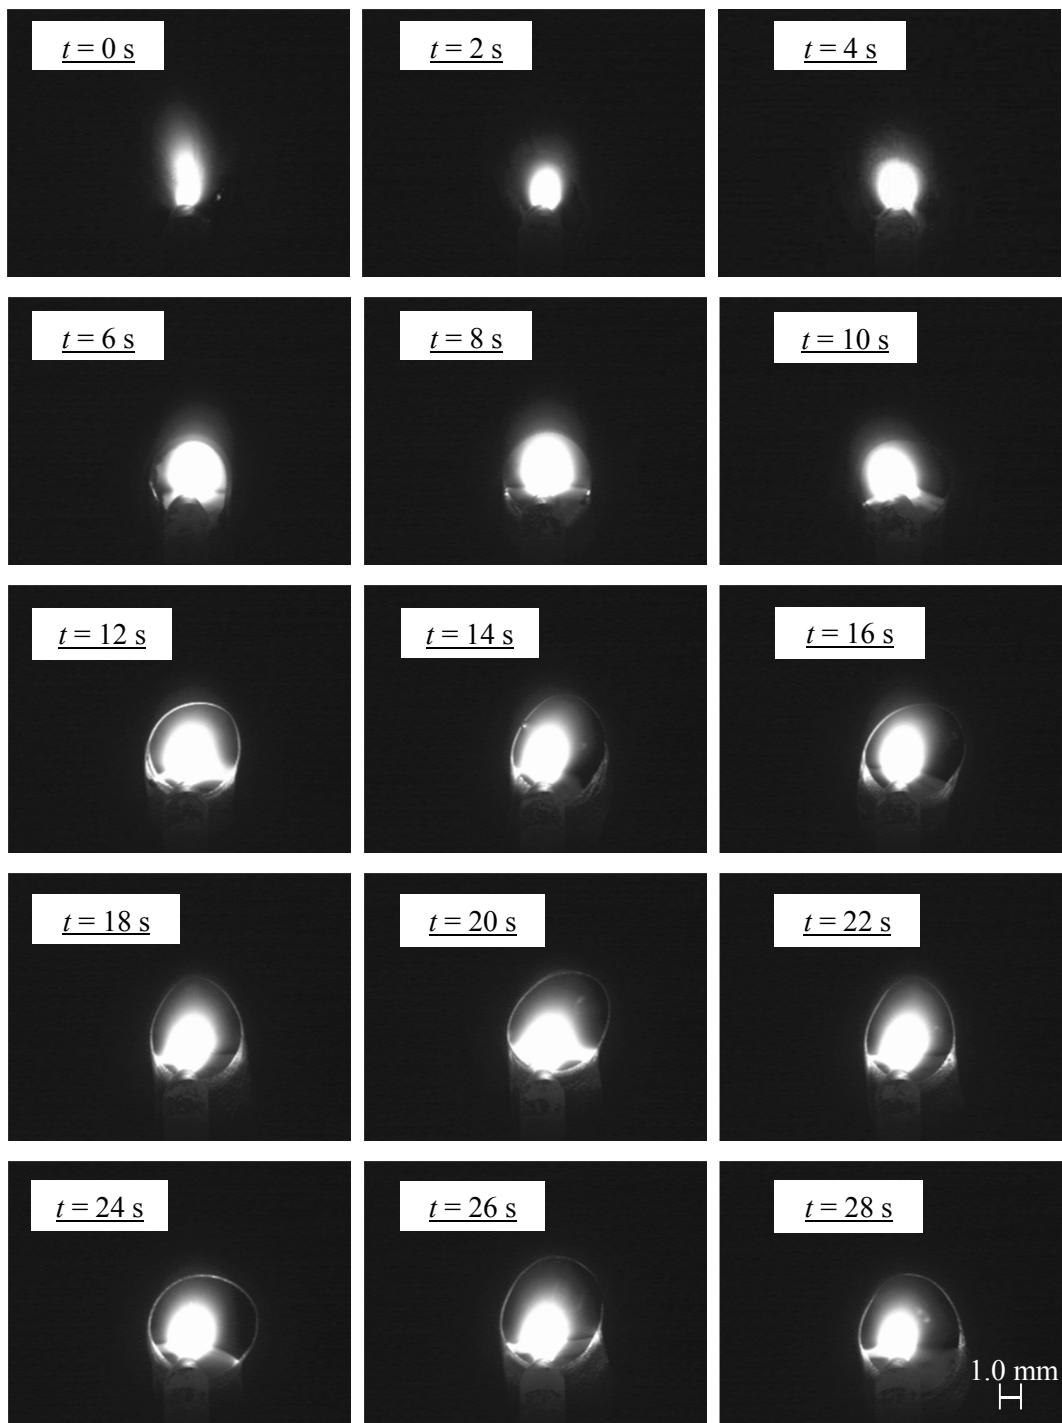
Image of molten pool and arc in hybrid welding ($y = 1.5$ mm)
